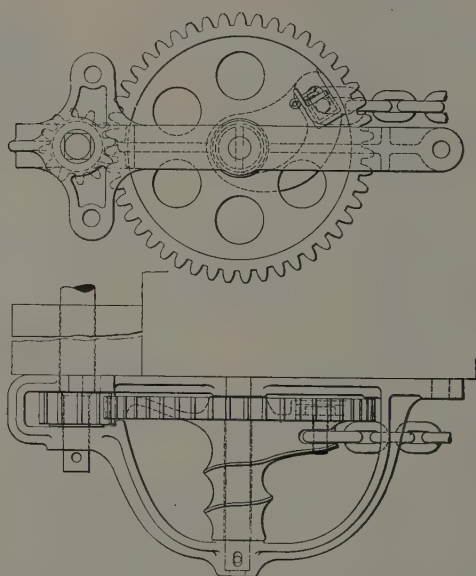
Peacock Geared Hand Brake for Freight Cars. National Brake Company, Inc.
